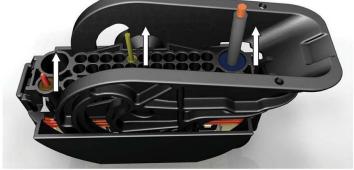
38-way connector, checking the primary locking mechanism Abb. 15: Kabelbaumstecker 38-polig, Kontrolle der Primärverrastung
